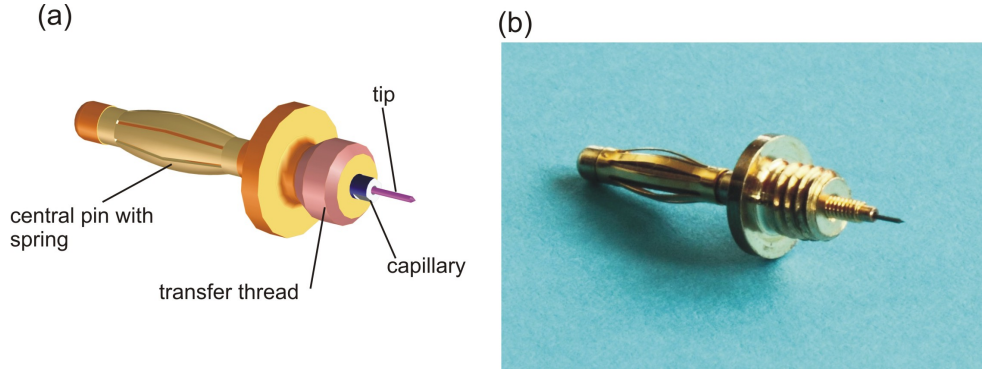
Tip holder. The design of the tip holder is based on a banana plug mechanism. A spring is mounted to the central pin. A socket with an outer thread offers a link for the transfer tool. The tip wire is crimped to a little capillary which is inserted into the socket.
